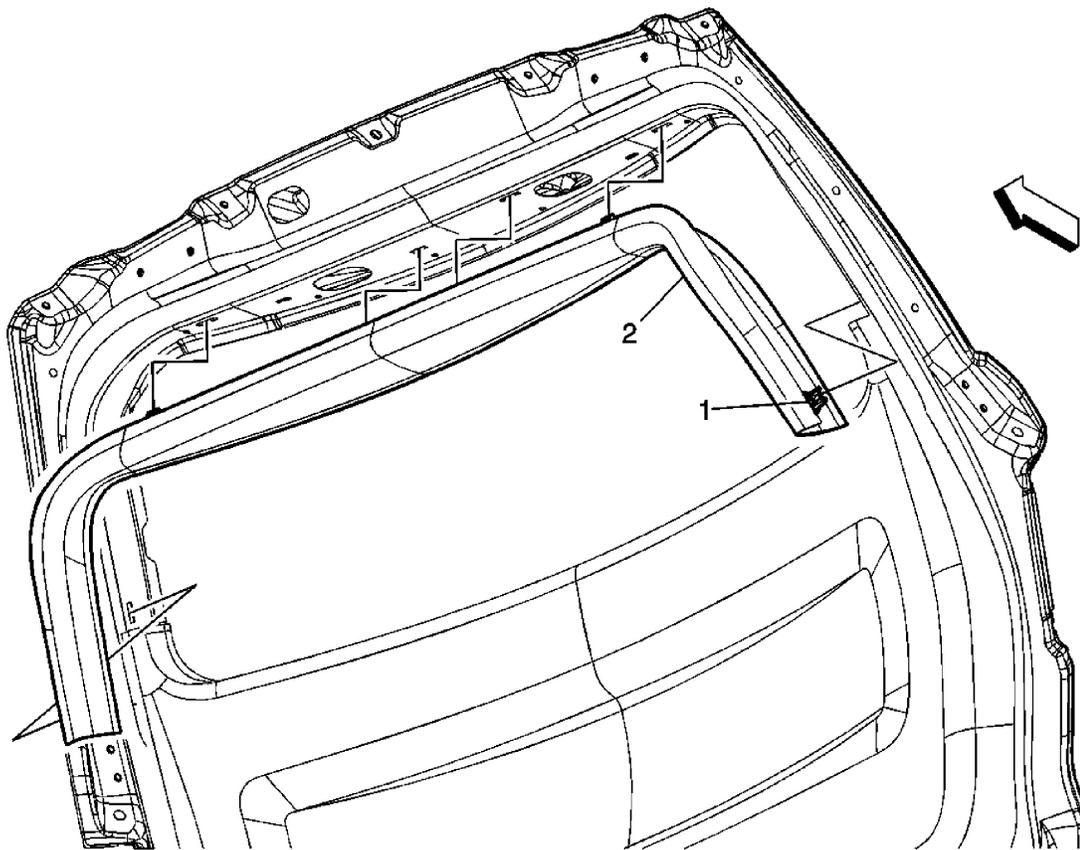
Identifying Liftgate Garnish Molding (Without RPO E61)
